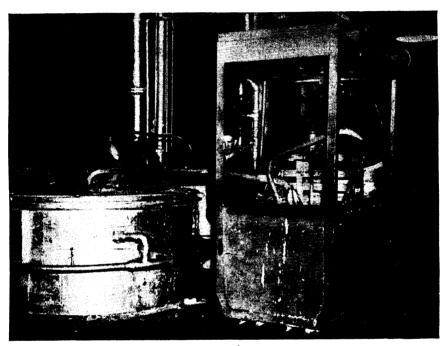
Pumping molten zinc alloy from a melting furnace to a power-driven truck. It then is transferred to the holding furnaces on the casting machines.
